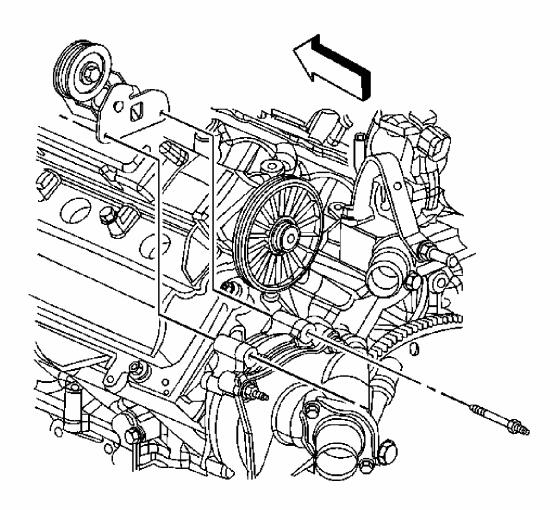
View Of Water Pump Drive Belt Tensioner Courtesy of GENERAL MOTORS CORP.
